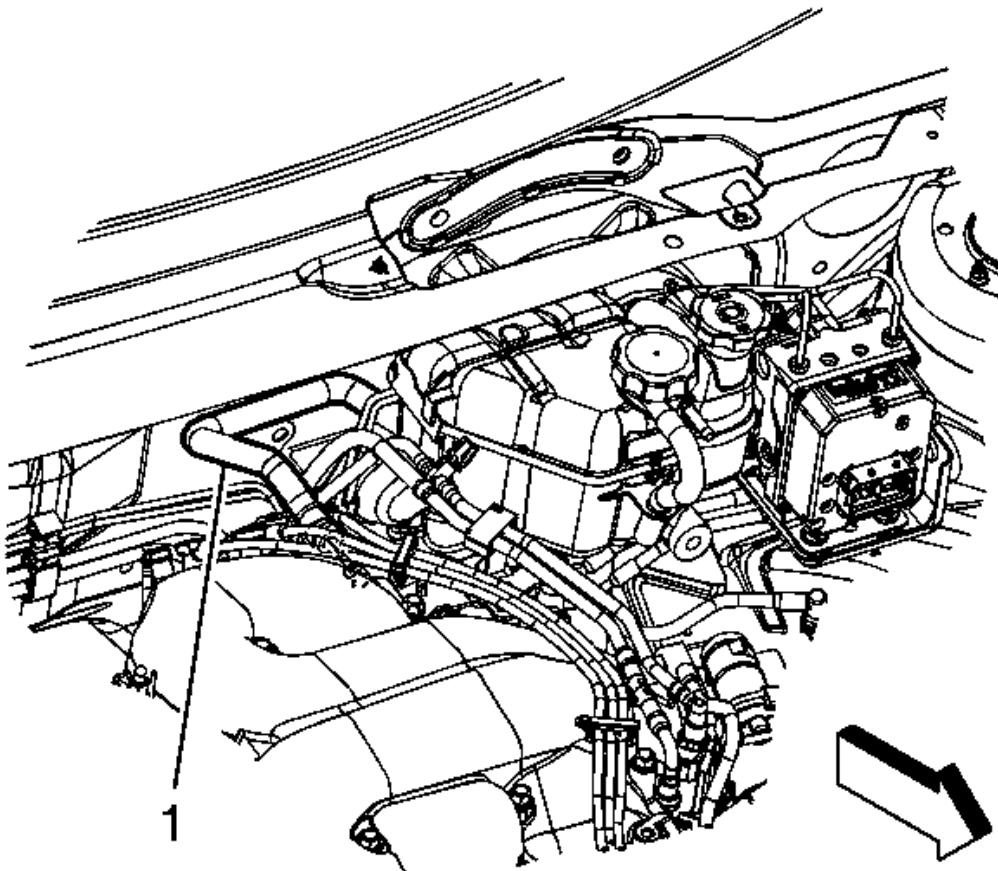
Brake Booster Vacuum Hose To Intake Manifold
